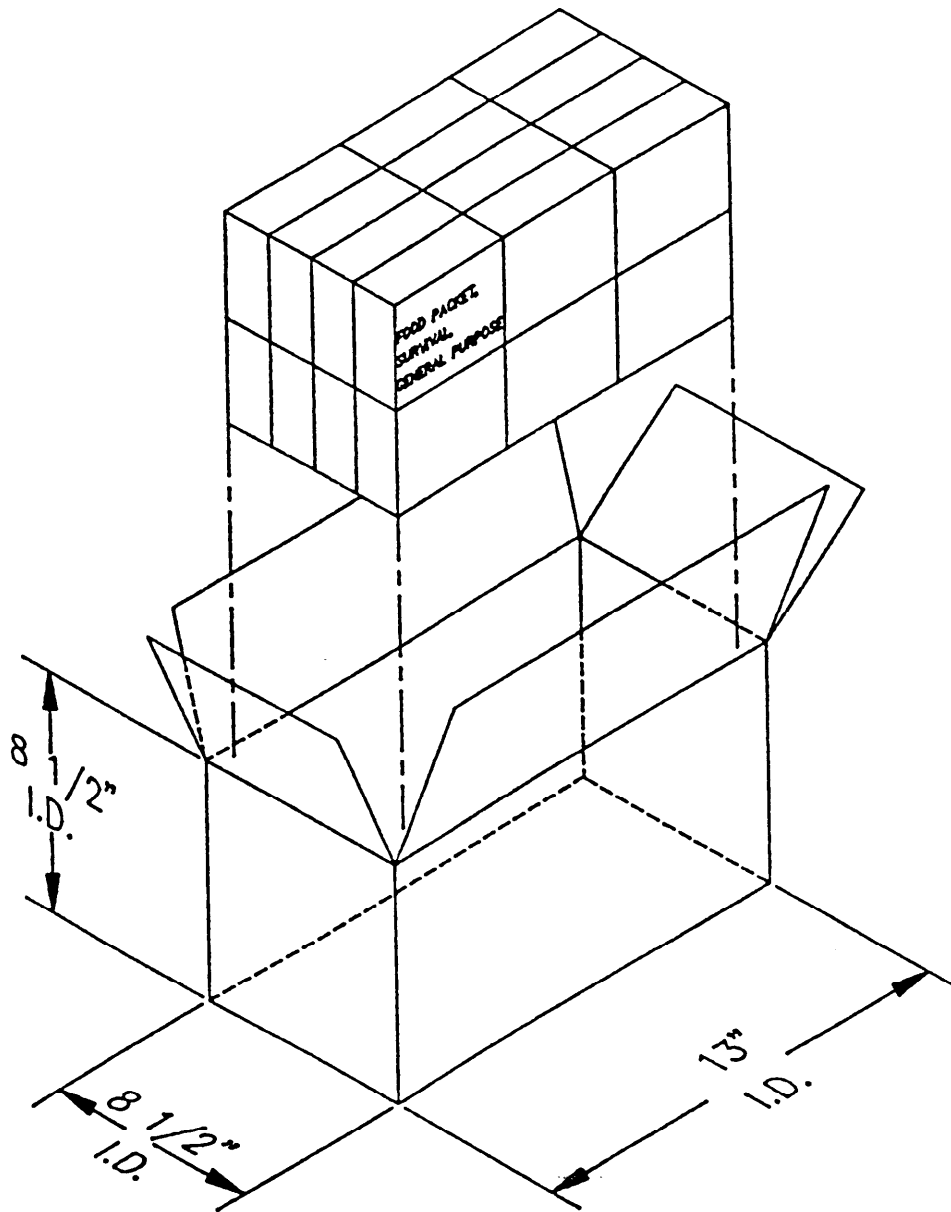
SHIPPING CONTAINER ASSEMBLY
